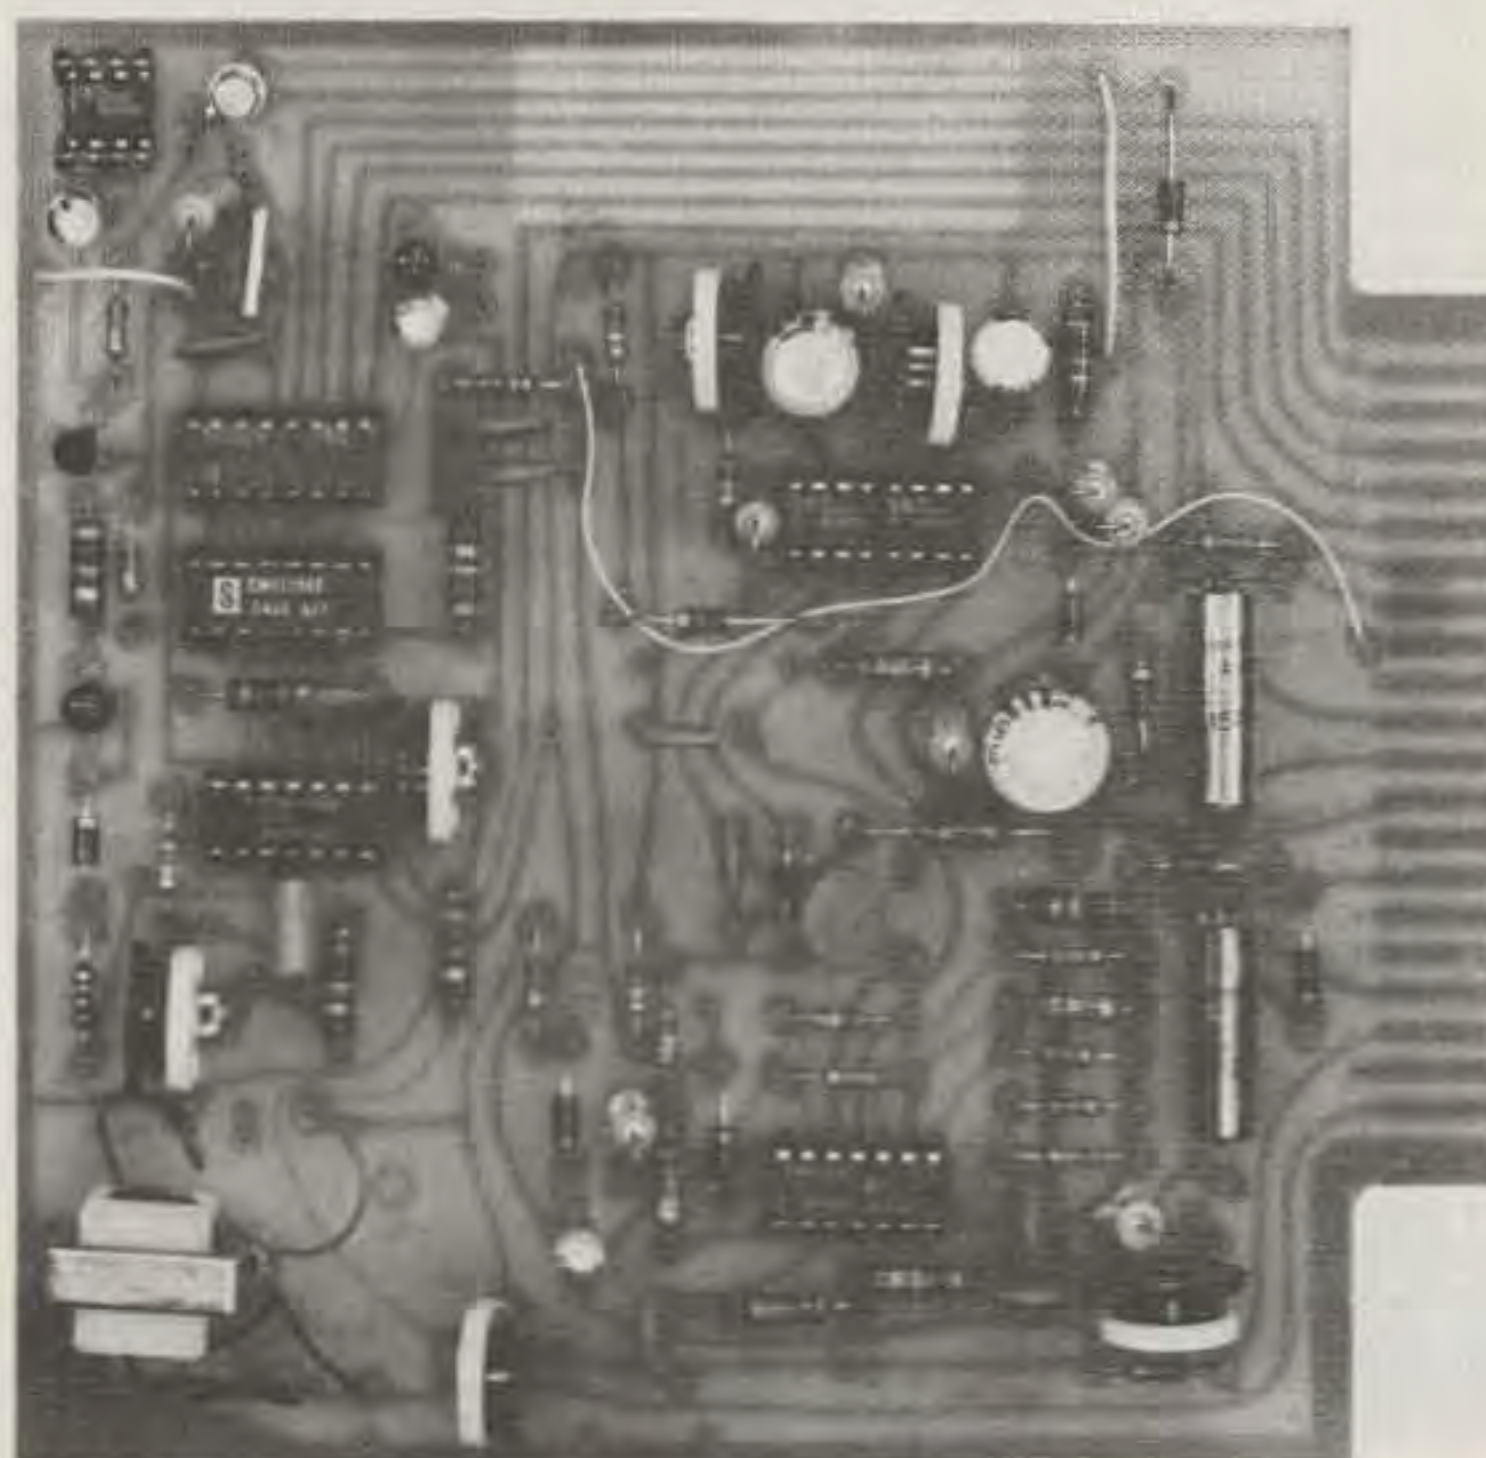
Photo F. Populated printed circuit board with externally mounted IDer on right side. Final version was all on one board.
